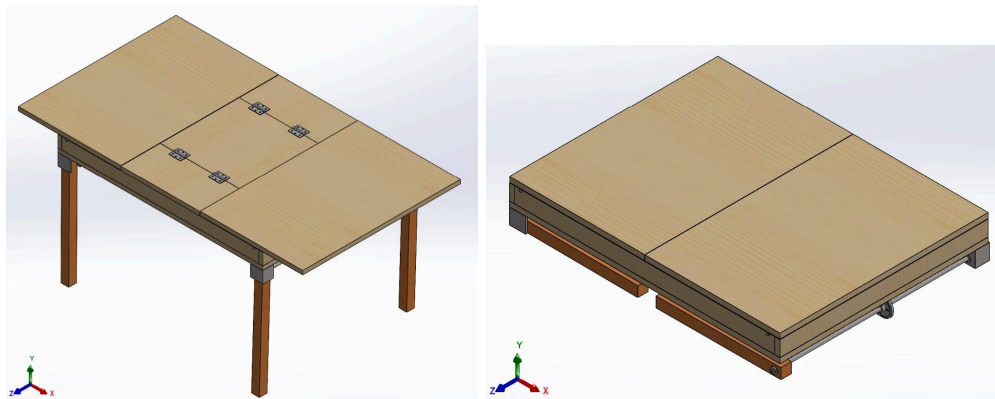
Full CAD assembly, open configuration (left) and closed configuration (right)
